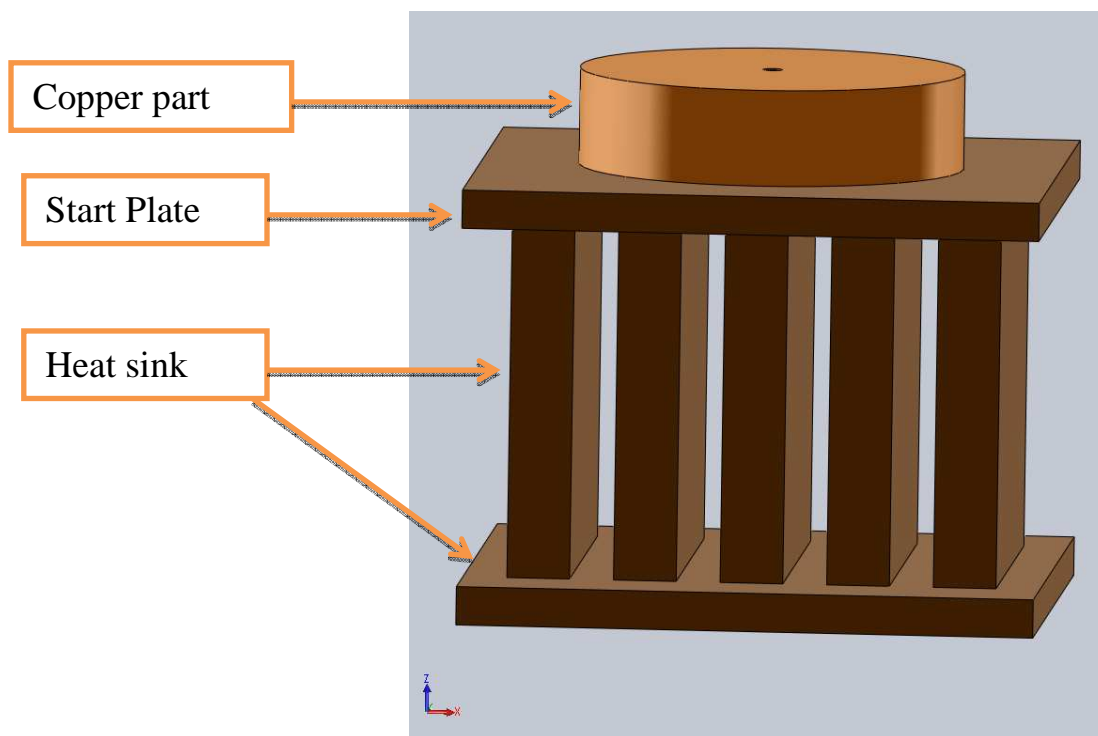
CAD RENDERING OF CU PART WITH INCORPORATED HEAT SINK
